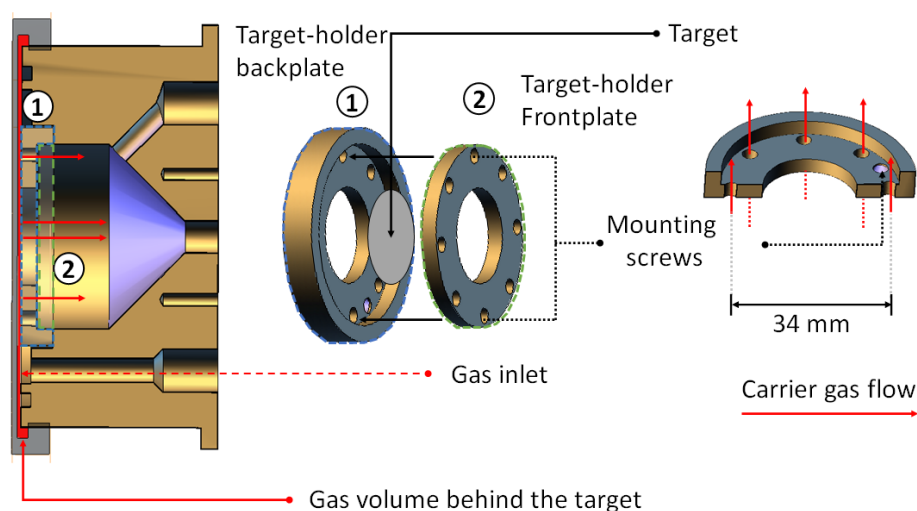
Schematic of the target-holder in side- and isometric view. The target-holder consists of two parts: (1) Back-plate and (2) Front-plate.)
